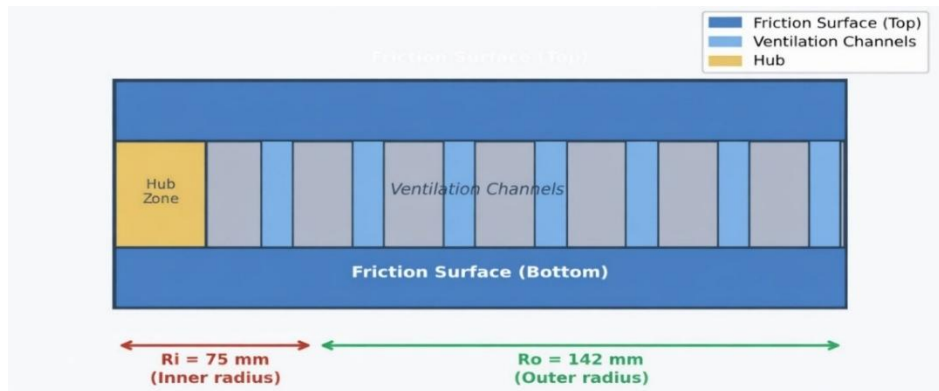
Cross-sectional schematic of the ventilated disc brake rotor (dimensions in mm)
